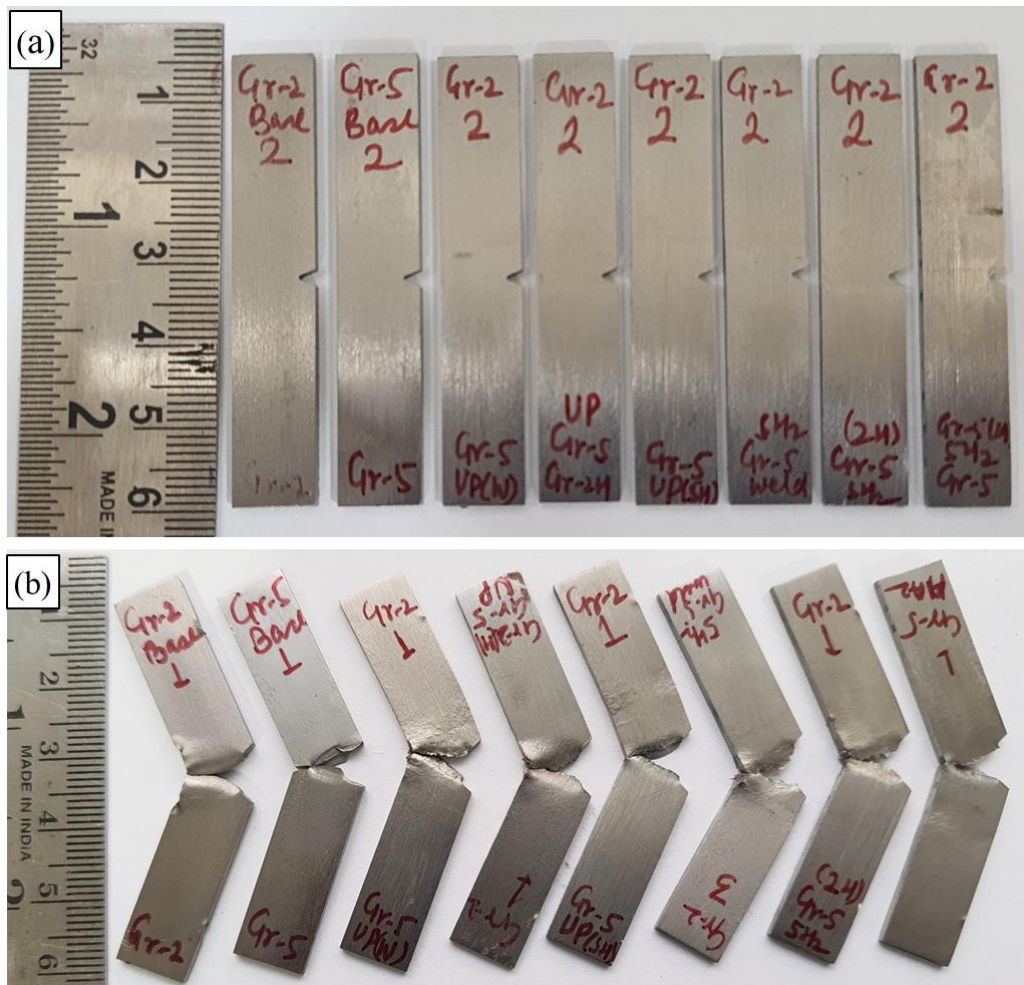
(a) Charpy impact test specimens of base and dissimilar welds with a notch at the center of the weld, and at the HAZ of CP-Ti and Ti-6Al-4V side; (b) tested and broken specimens of base and dissimilar welds with a notch at the center weld and at the HAZ of CP-Ti and Ti-6Al-4V side
